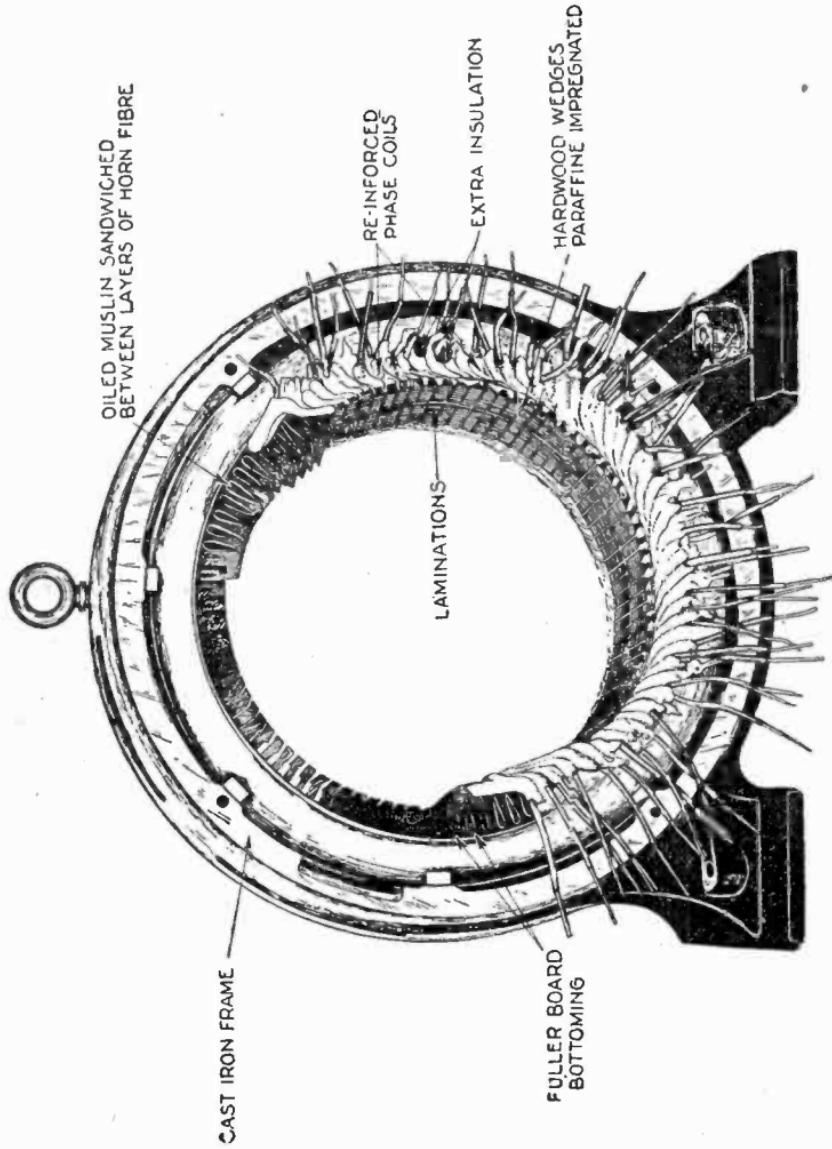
,790.—*Triumph slip ring motor construction.*—2. Frame with field winding partially assembled. Coils are form wound, treated and wrapped.
